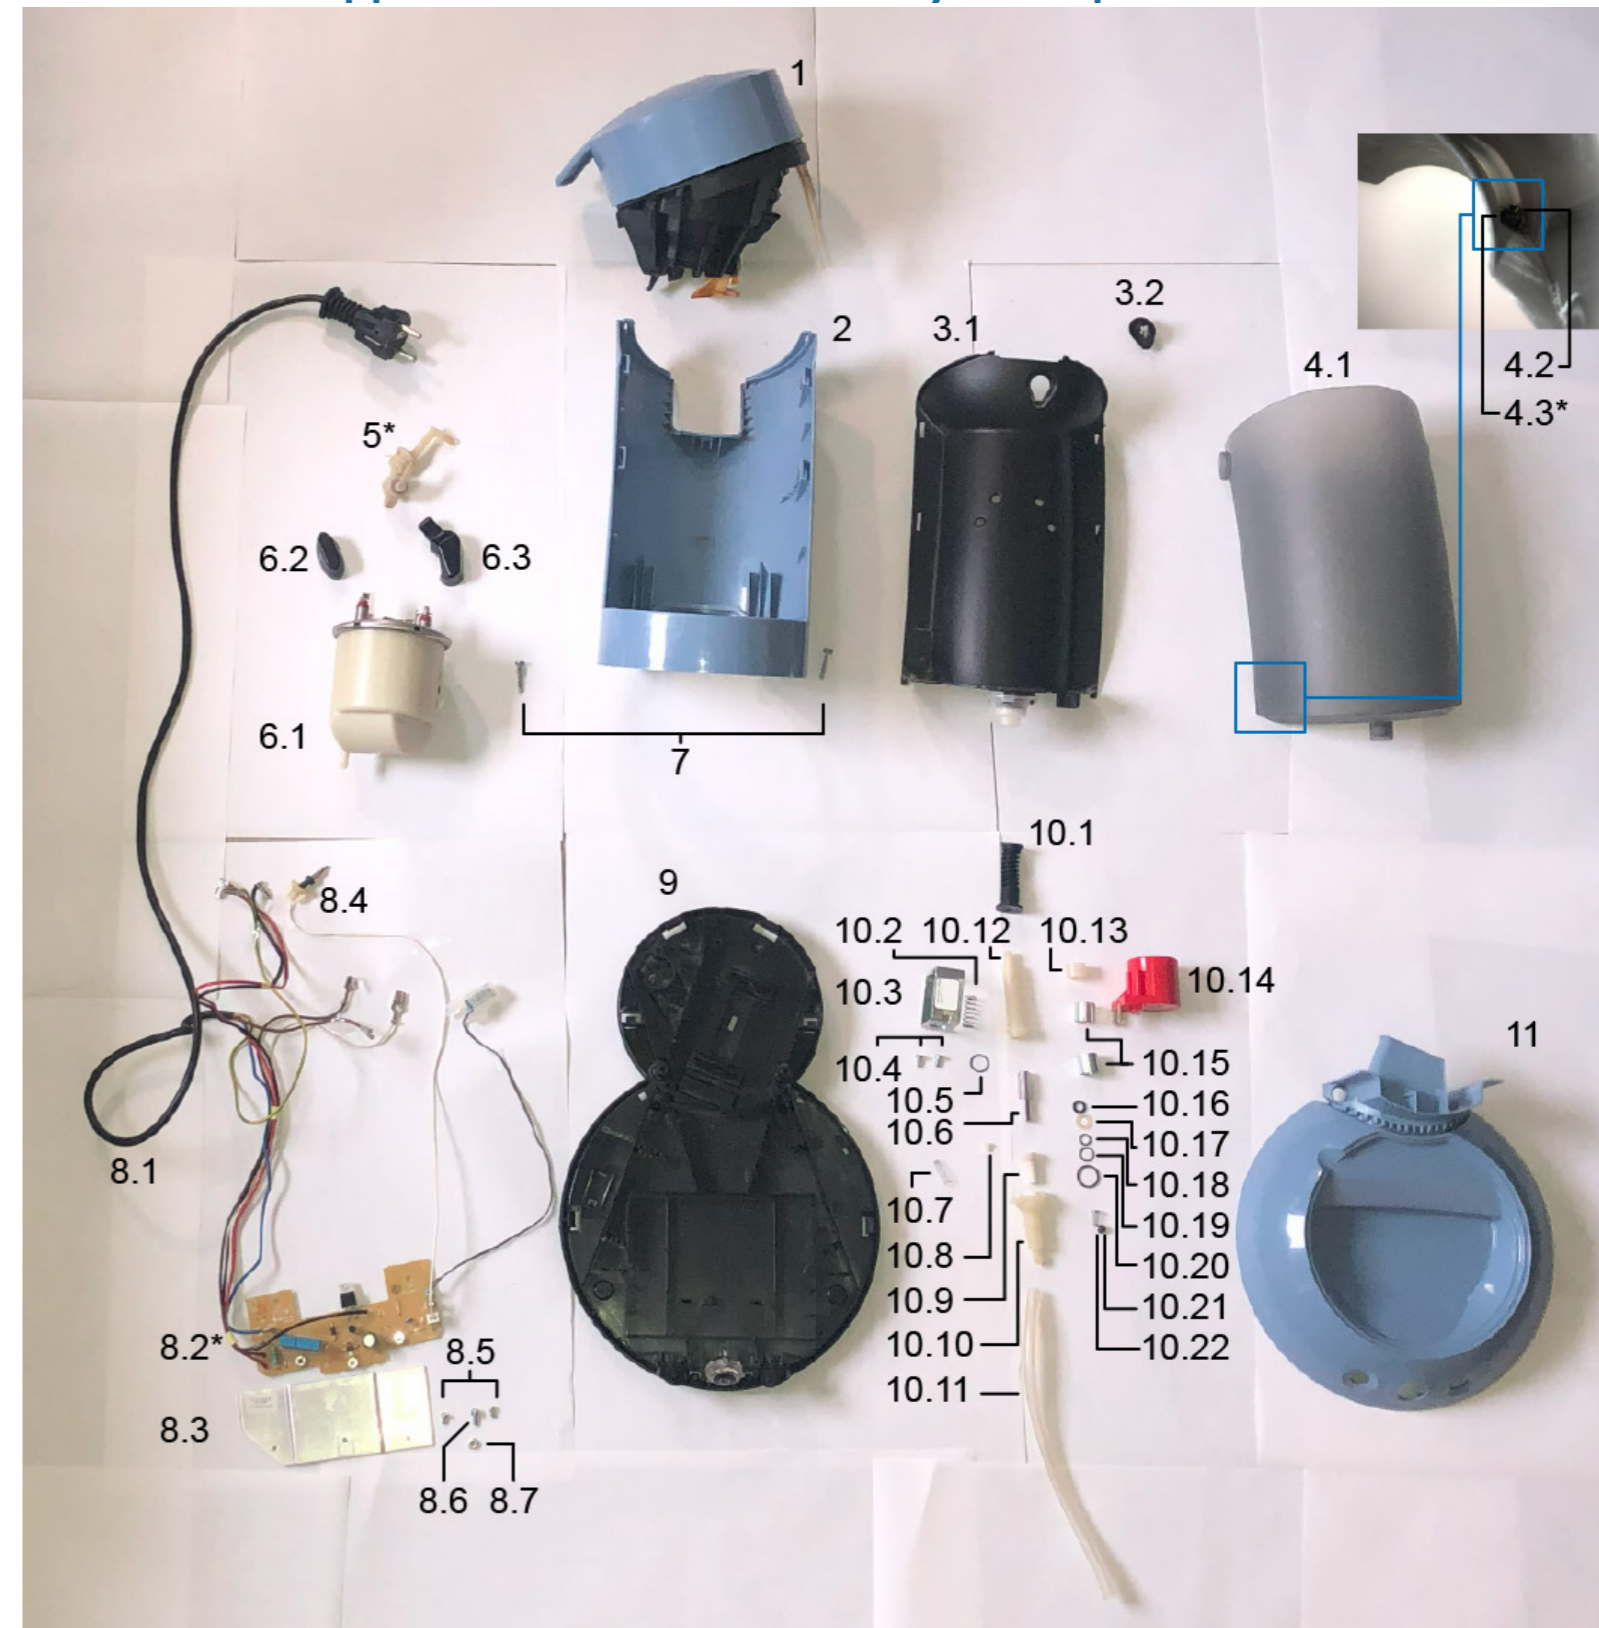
Detailed exploded view of Senseo (*) are the critical parts)
